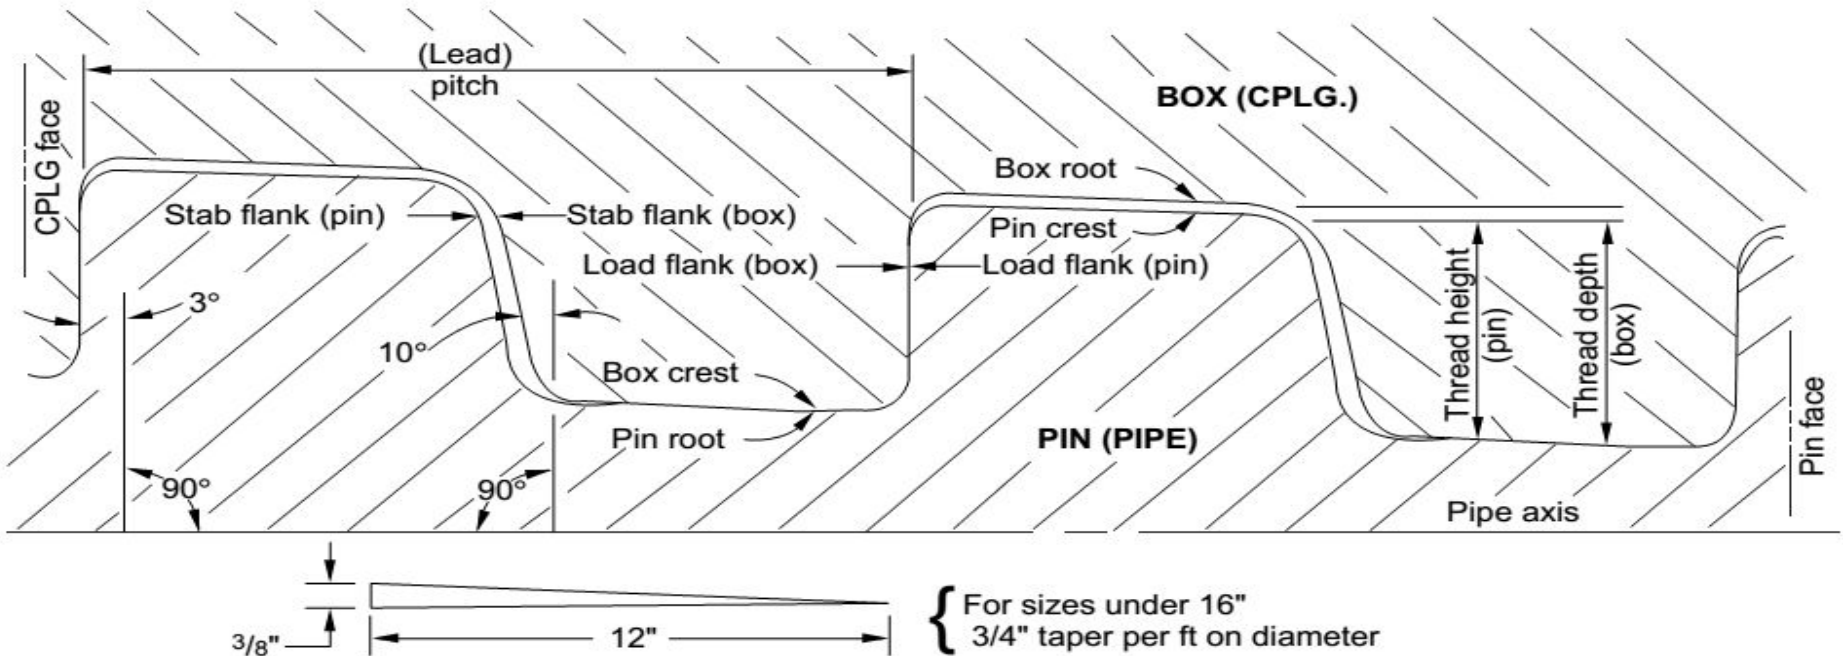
Buttress Thread Configuration for $1\frac{3}{8}$ -in. OD and Smaller Casing
